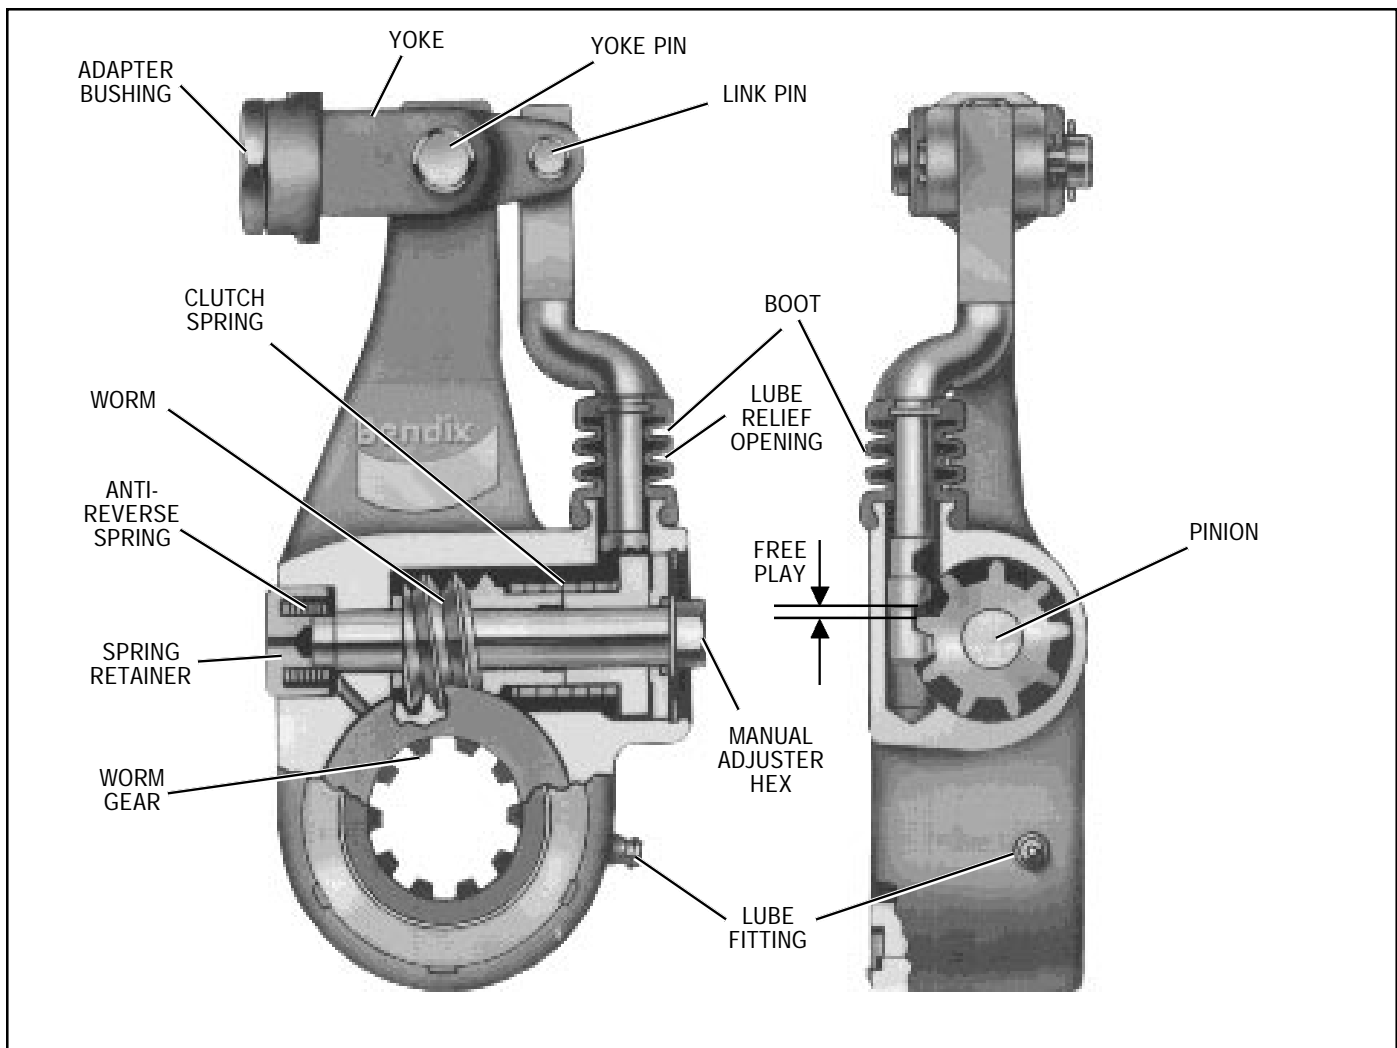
SECTIONAL VIEW OF PROFILE AND END
